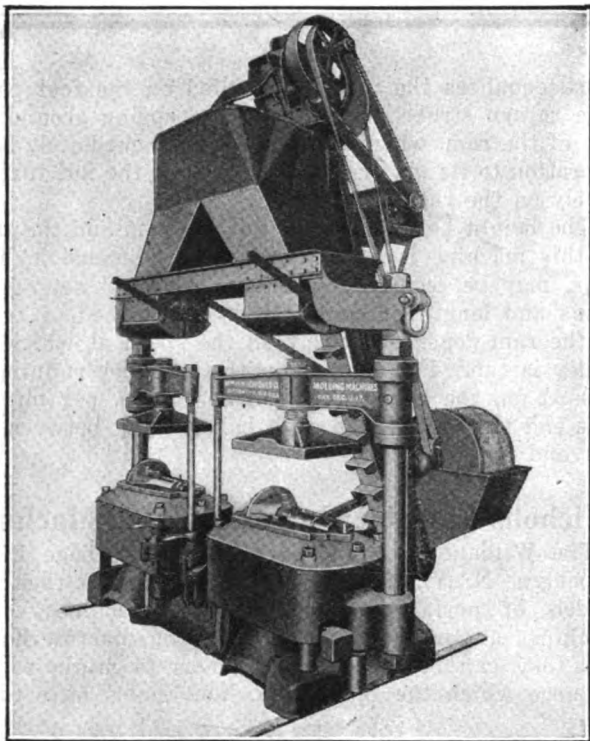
NICHOLLS 12-36 TYPE D DUPLEX SELF-CONTAINED MOLDING MACHINE
